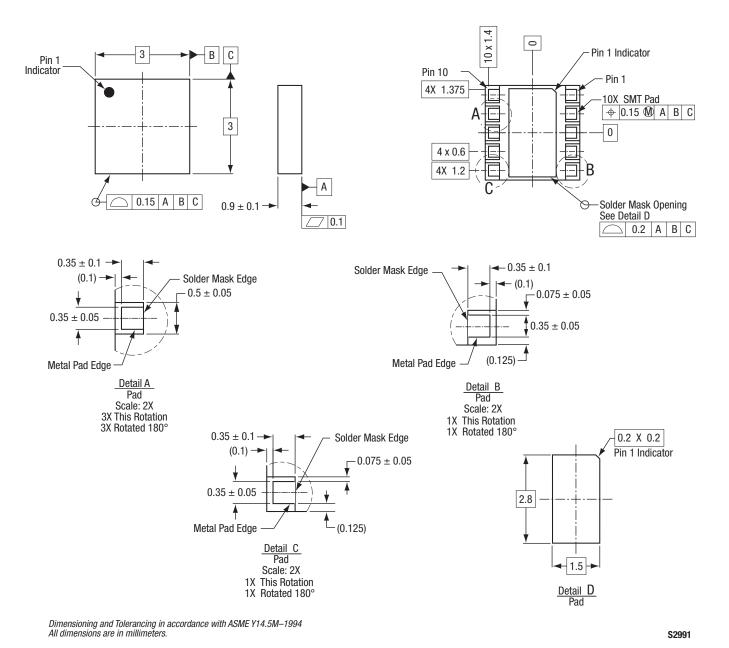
SKY66002-11 10-Pin MCM Package Dimensions
